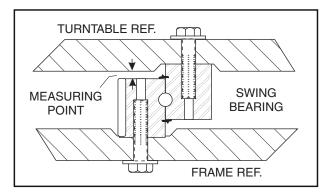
Swing Bearing Tolerance Measuring
